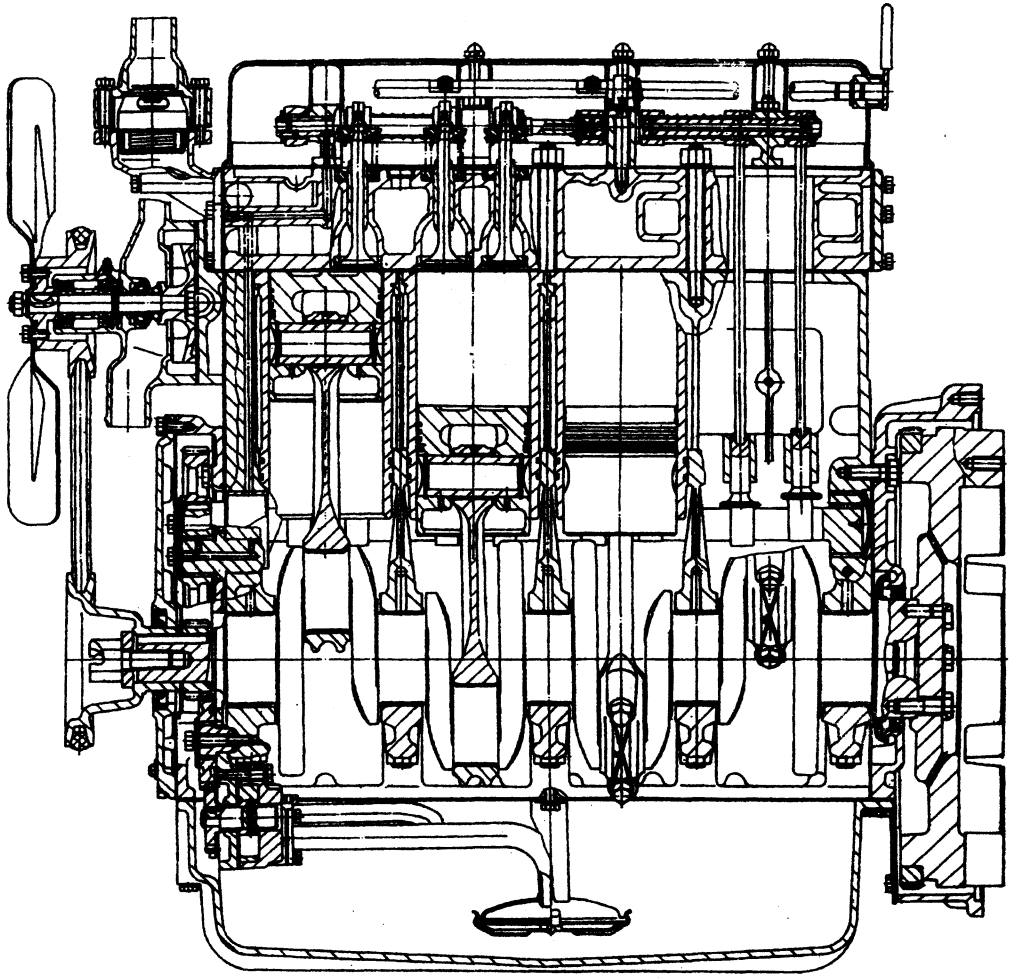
Longitudinal sectional drawing for 495 diesel engine
